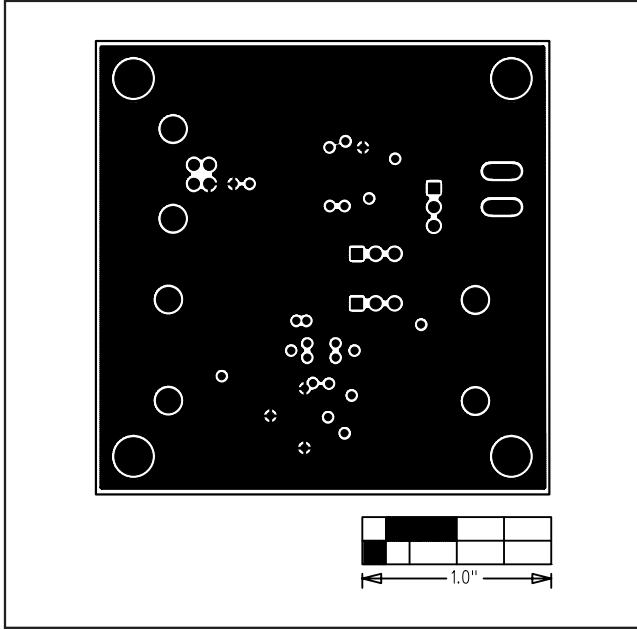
MAX4983E EV Kit PCB Layout—Inner Layer 3
